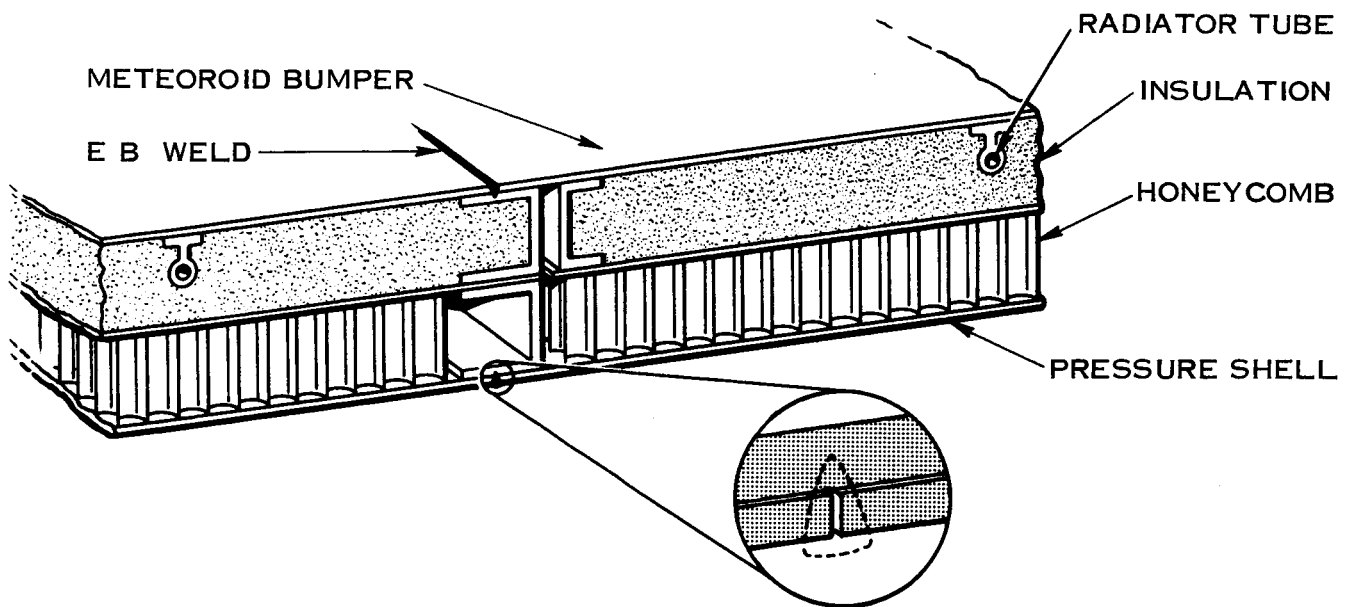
E B WELDED SELF ALIGNED WALL JOINT
